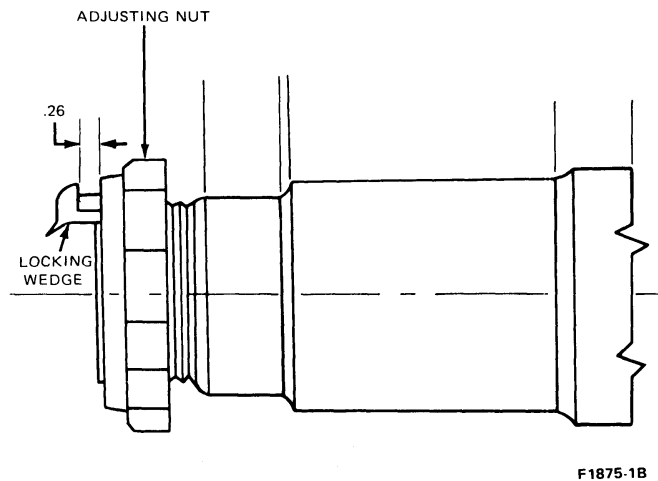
Positioning Locking Wedge—E-250, E-350 and F-350
